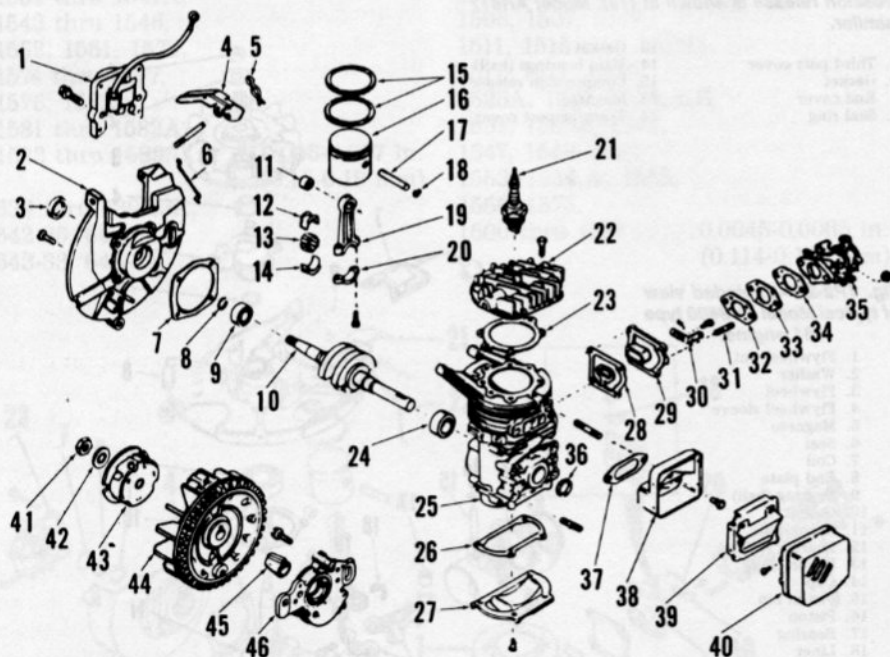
Exploded view of typical Model AH520 type 1600 engine. Model AH600 is similar.
